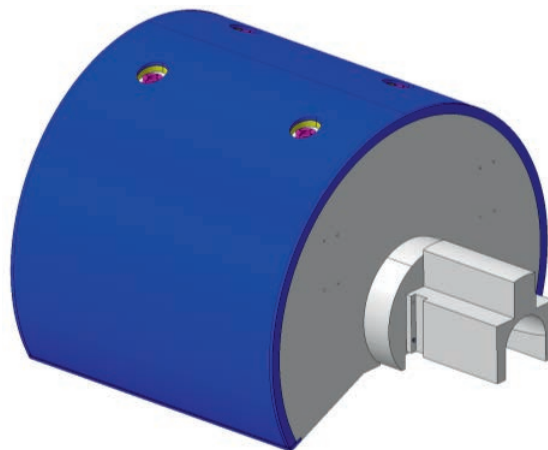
3D view of the ATLAS JFC2 module. Presently the module is a cylindrical shaped block, while for HL-LHC an “extra nose” shielding will be added to fill the gap required in JTT for the detector opening without removing VAX.
